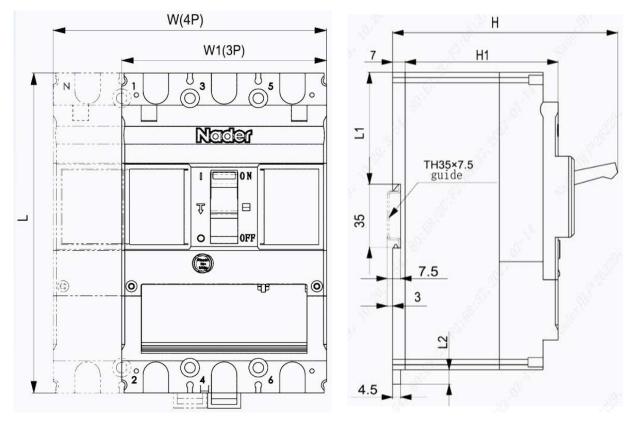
Installation Dimensions of Guide Rails Table 21 Overall dimension of guide rail installation table (unit:mm)
